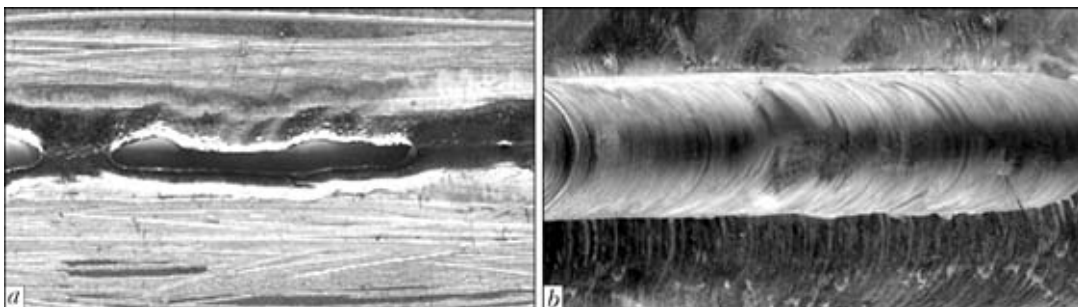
Appearance of the welds made by TIG welding in argon atmosphere (*a*) and FSW (*b*) on 1 mm thick aluminium alloy Al94Fe2.5Cr2.5Ti1
